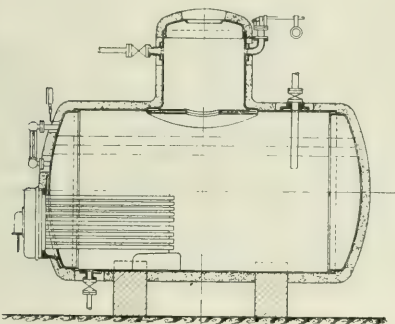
SECTION OF ELECTRIC STEAM BOILER FOR 500 KW.
